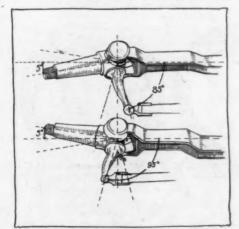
ILLUSTRATING WRONG STEERING ADJUSTMENT
